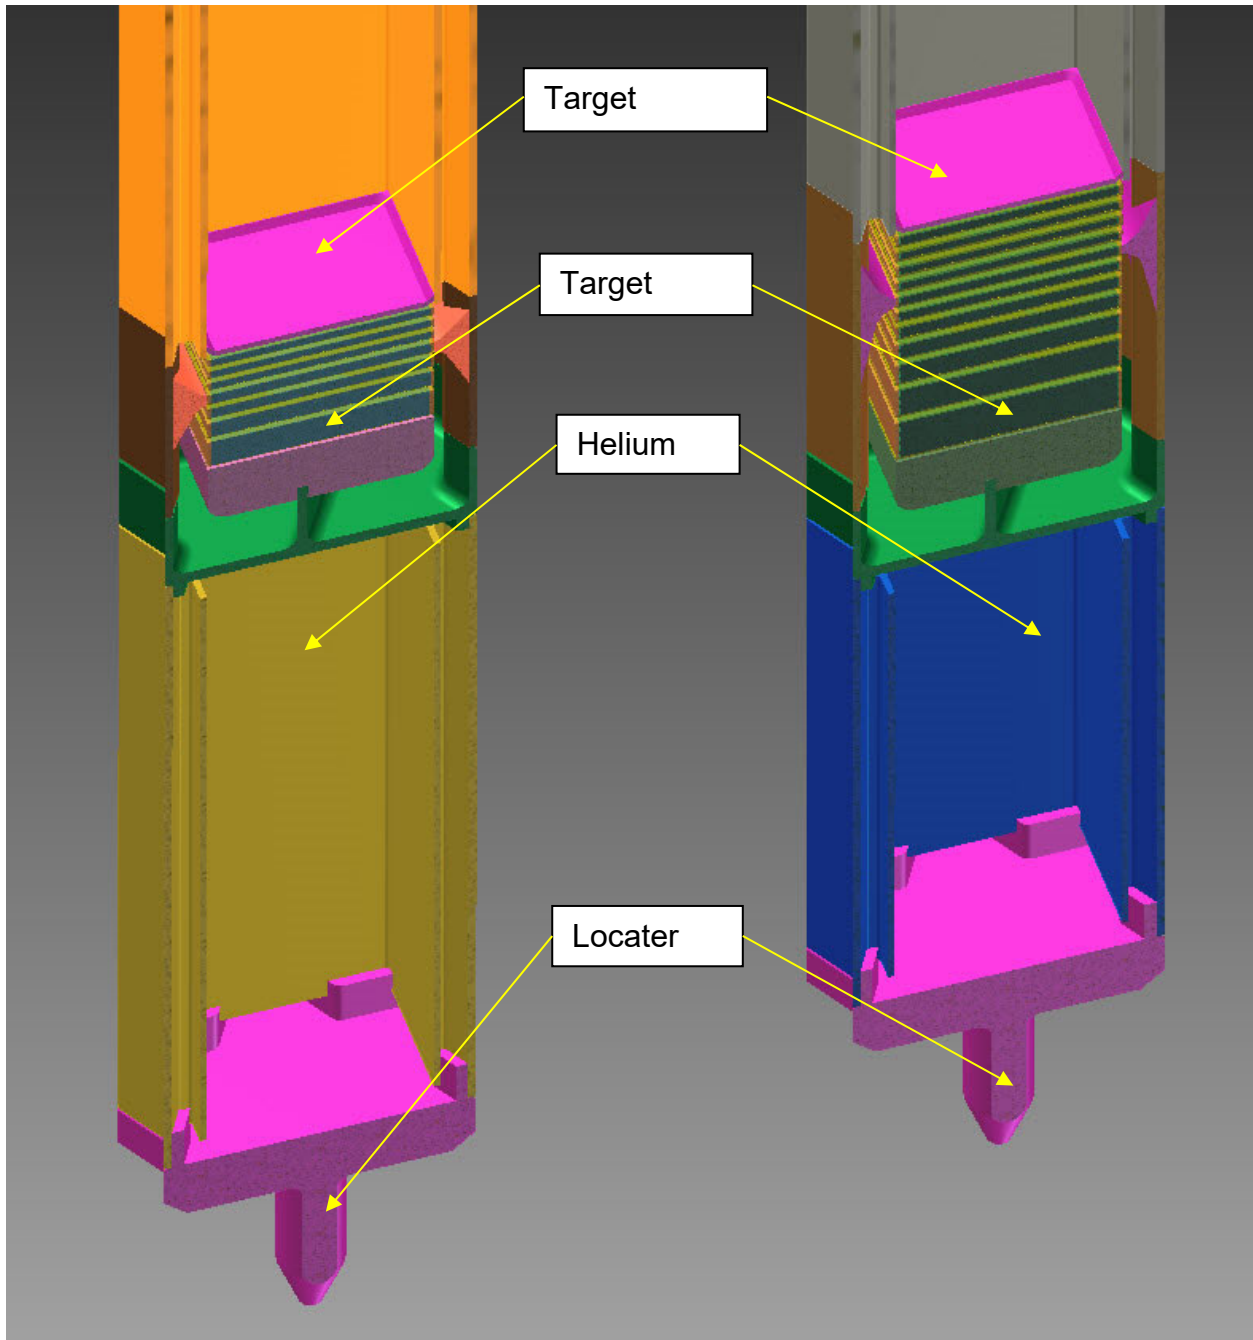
The tungsten target assembly (left) and the uranium target assembly (right) are shown side by side in this offset section view. The effective center of both target plates is at the same height within the subcritical assembly. Bottom locator pin, helium chamber, lower manifold, target plates, and electron beam windows are visible.
